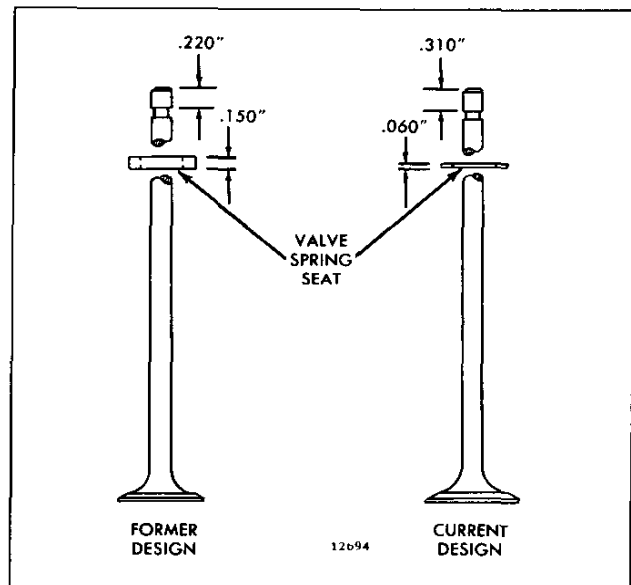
Former and Current Design Exhaust Valves (Four-Valve Head)
